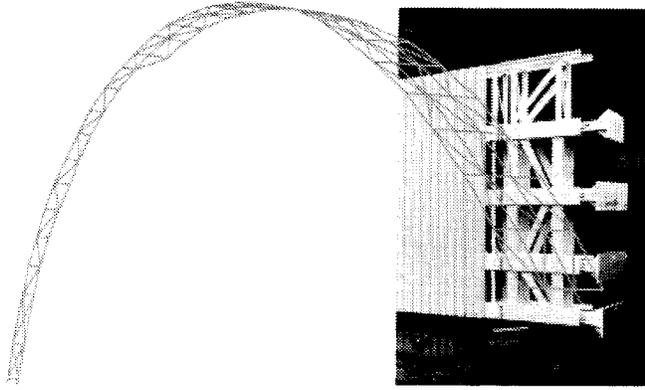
CNC bending of T beams, Courmayeur Tunnel.
